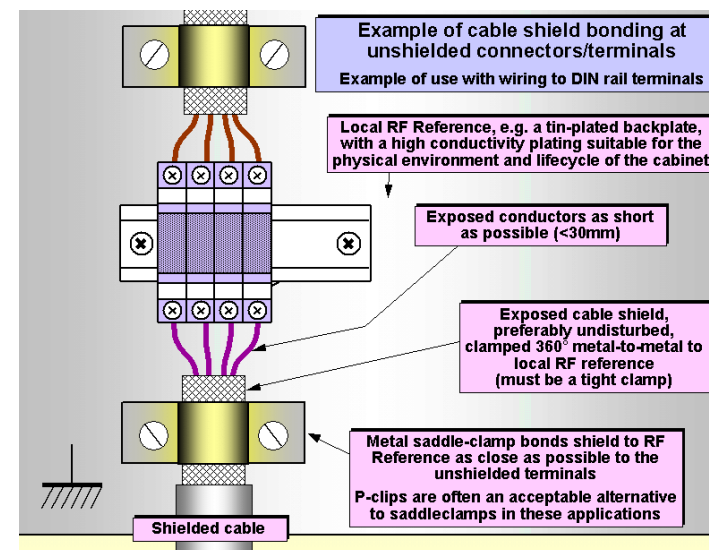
shows DIN rail mounted terminals, but they could instead be screw or solder terminals or unshielded
